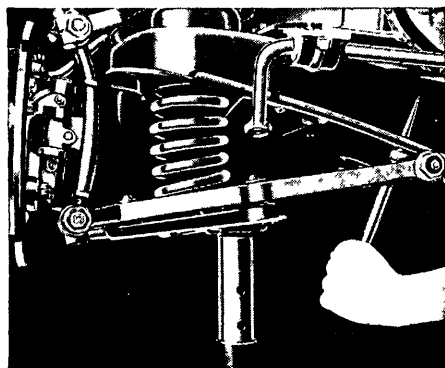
Aligning lower control arm shaft bracket and frame. 1939-48
